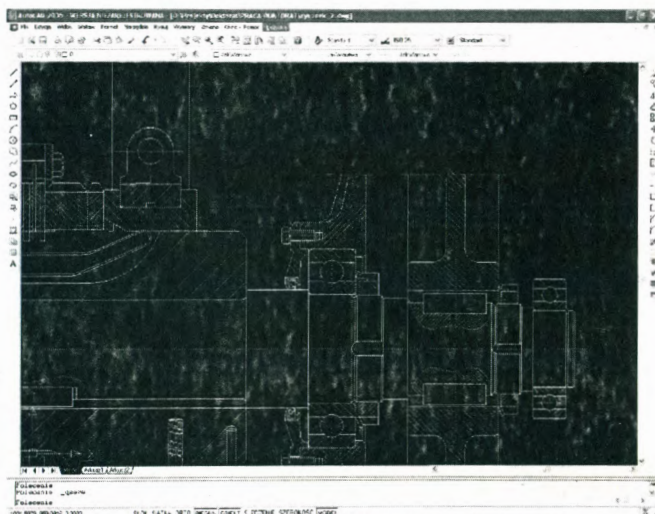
Application for selection of rolling bearings – AutoCad drawing
